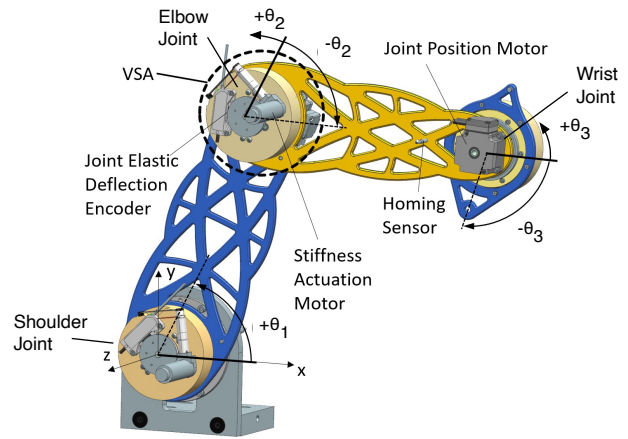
CAD Assembly Drawing of VSA-Driven 3R Robot.
